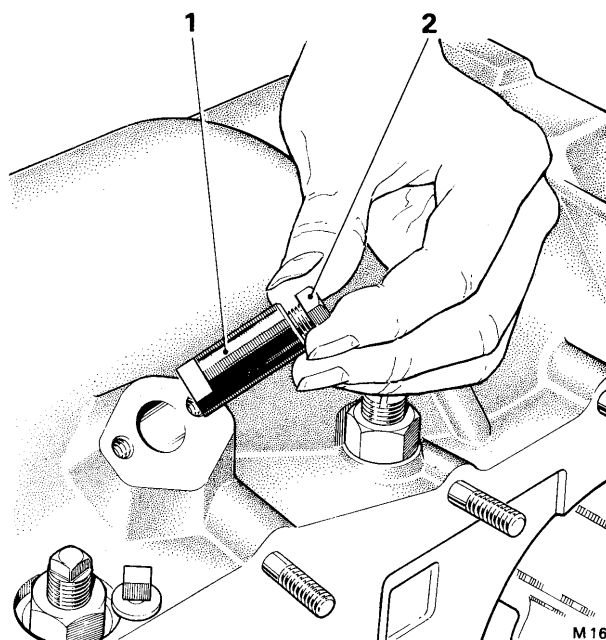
REMOVING THE CENTRE CLUTCH KEY
